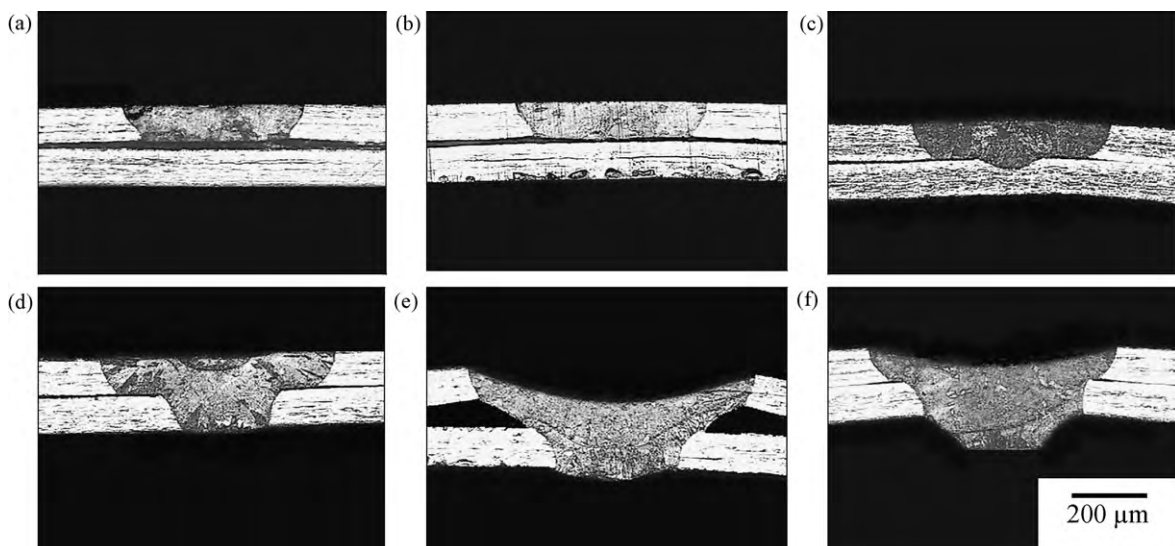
Cross sections of lap joints made with pulsed Nd:YAG laser welding with different pulse energies. Laser weld parameter: incident angle = 90°, focal position = 0, pulse duration 4 ms and laser energy at: (a) 1.0 J, (b) 1.25 J, (c) 1.50 J, (d) 1.75 J, (e) 2.0 J and (f) 2.25 J. All figures have the same magnification as shown in (f).
